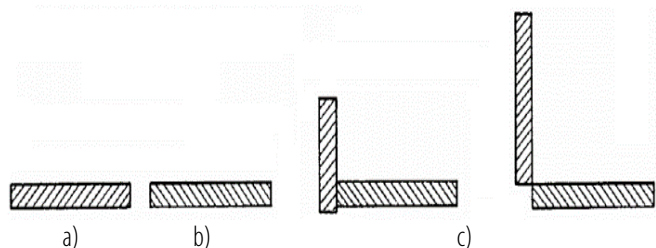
Schematic presentation of the welded joint: a) butt, b) corner and c) corner-edge
